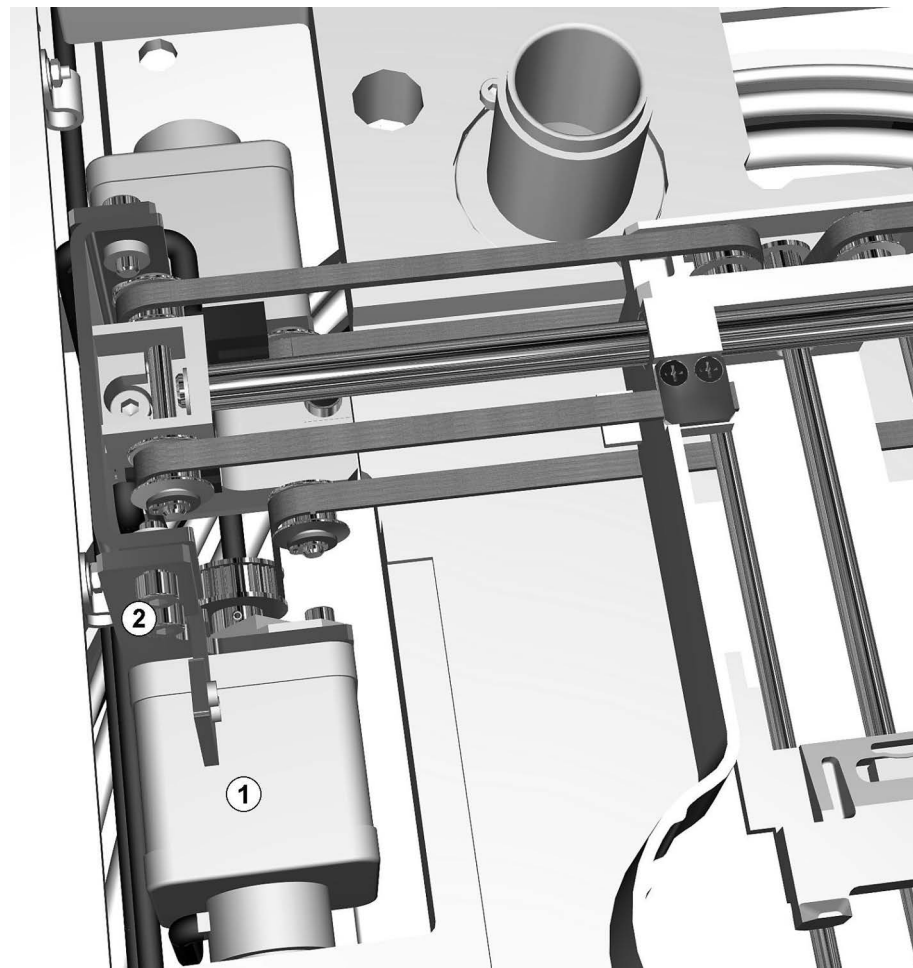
X-motor with encoder (back view without plate carrier detection sensor)
